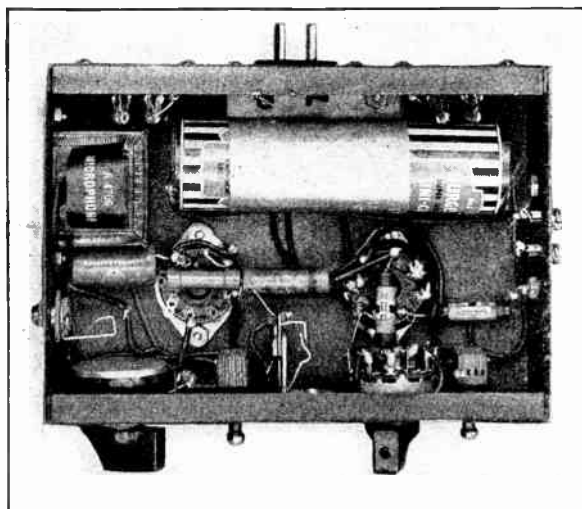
Underneath view of the 6J5-6L6 Class-A modulator unit. Parts are placed wherever found most convenient in wiring.
